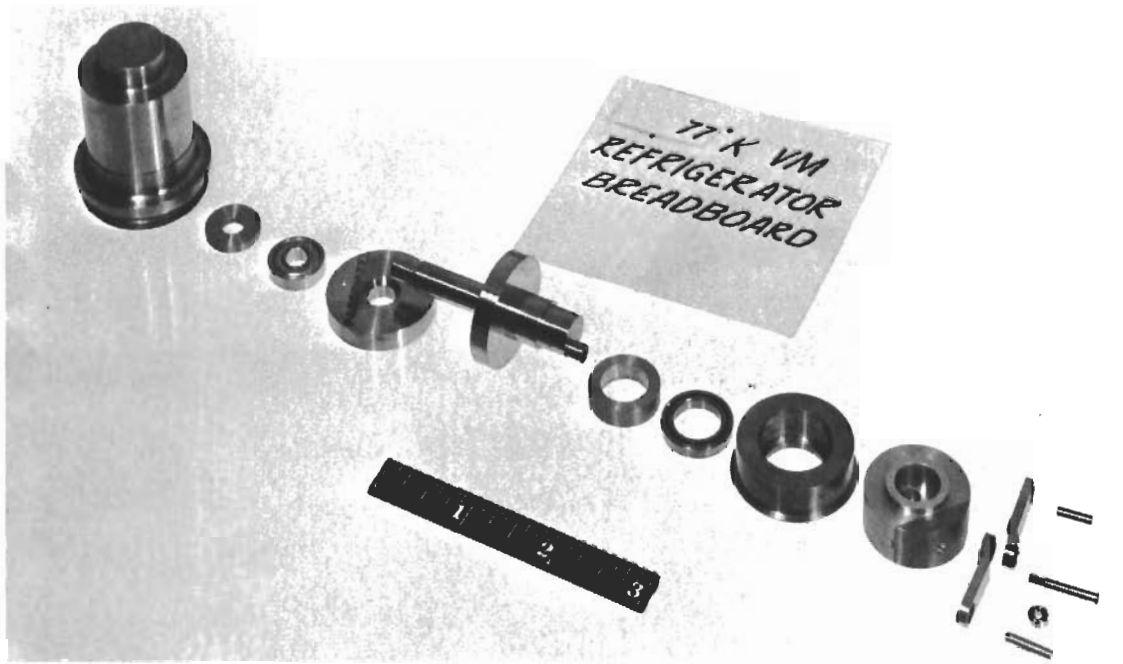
Crankshaft assembly parts of unit X447525-100 (HAC photo 4R02915)
